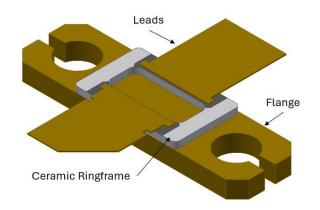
Header Assembly has 3 materials the Flange, Ceramic Ring frame, and the Leads. These 3 materials are fused together.
